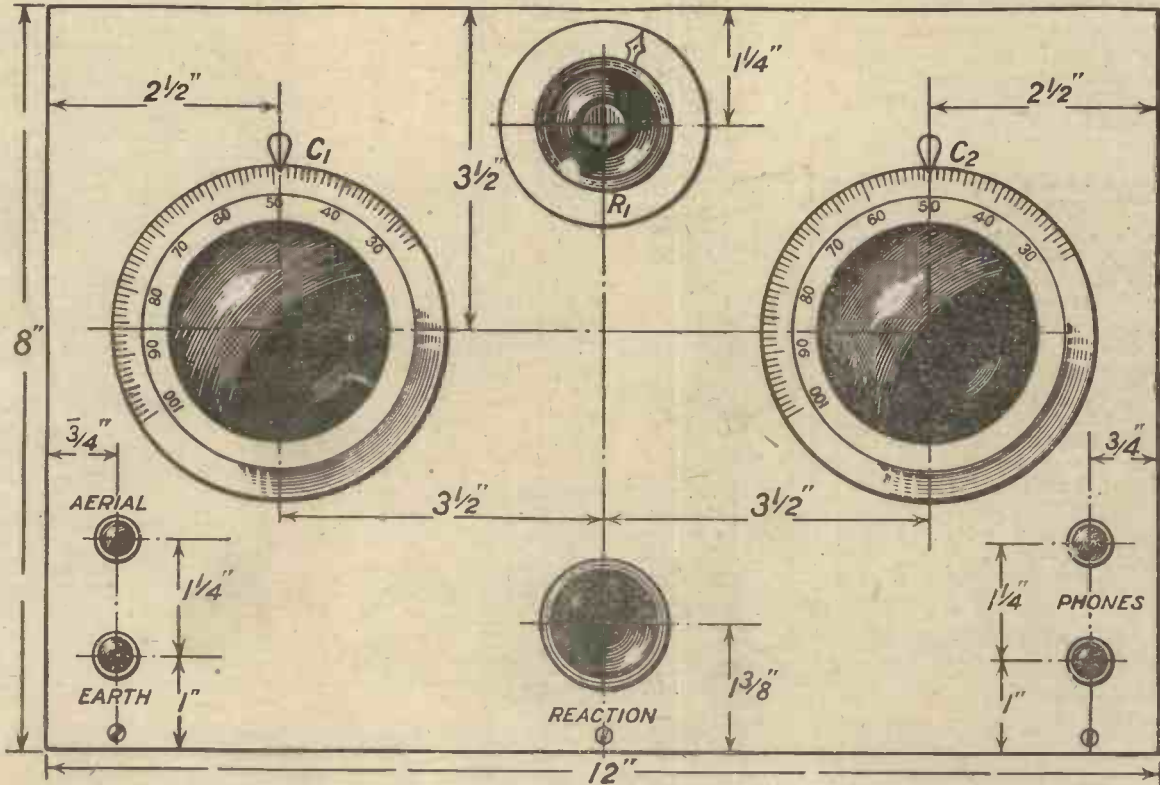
The panel layout is symmetrical and all drilling dimensions are given here. Blueprint C 1041A.
